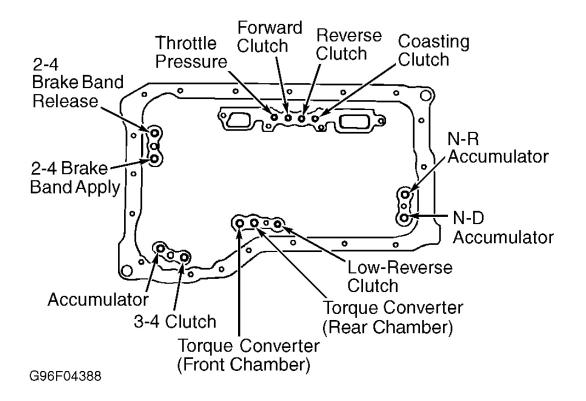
Identifying Transaxle Case-To-Valve Body Oil Passages Courtesy of FORD MOTOR CO.
